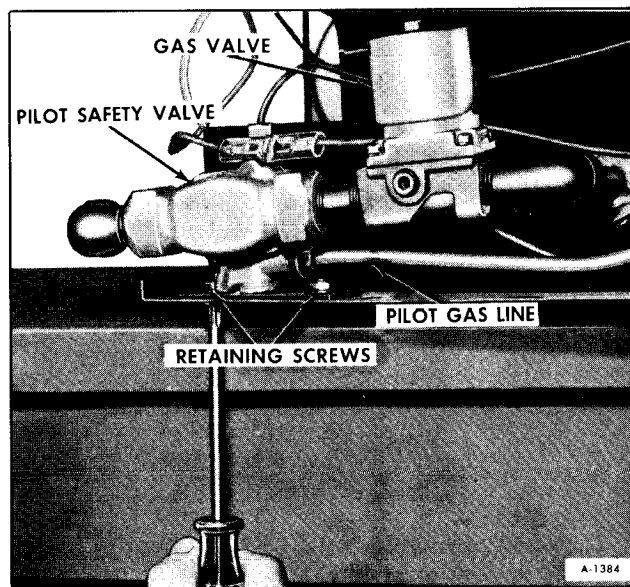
(NT-22G) Removing Pilot Safety Valve Retaining Screws
